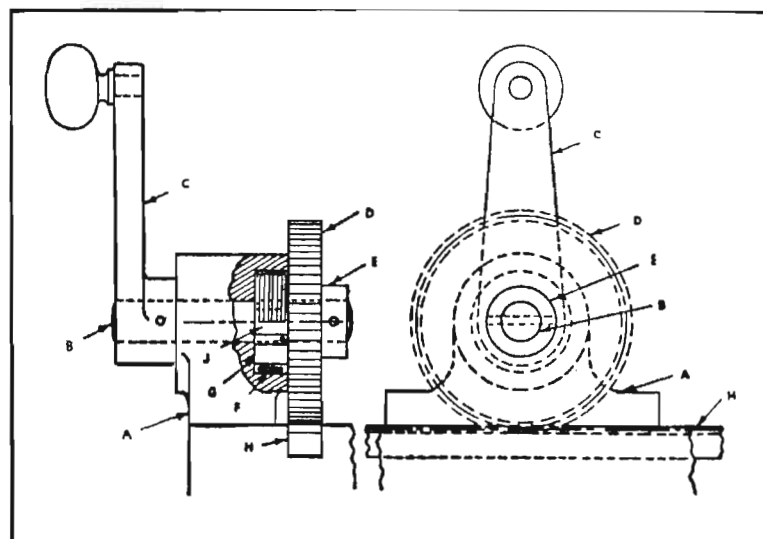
A Rack-and-pinion Motion Assembly in which Movement of the Rack can be Obtained Only by Rotating the Pinion.
